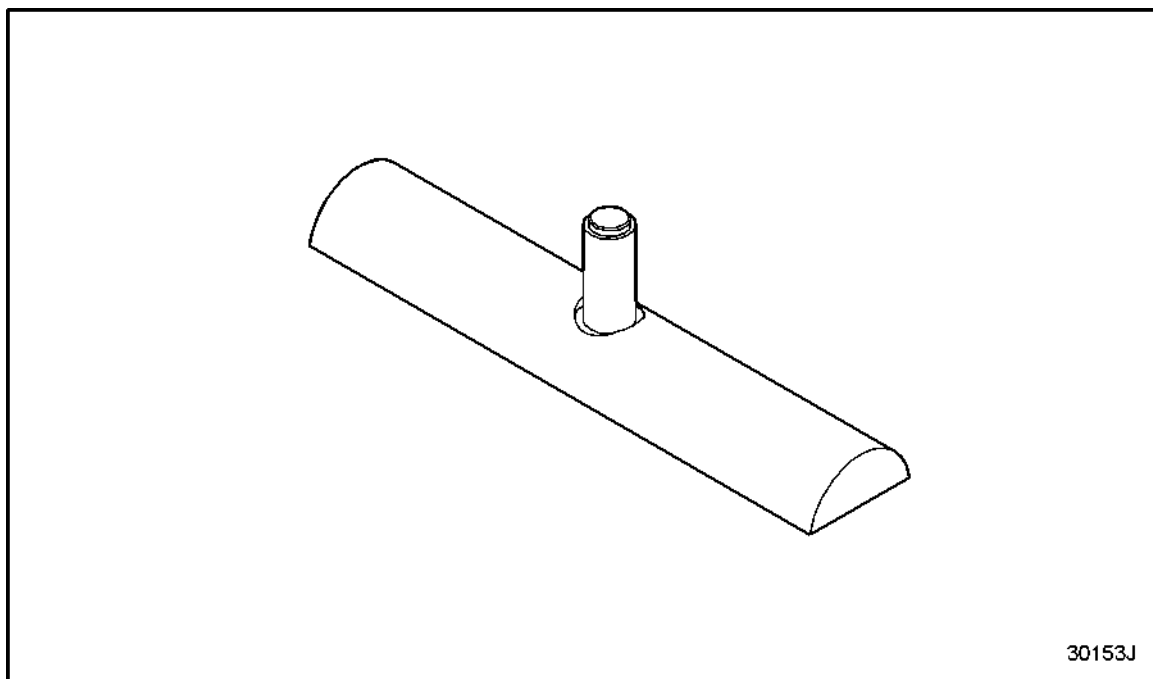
Connecting Rod Nozzle Remover,J 8995
